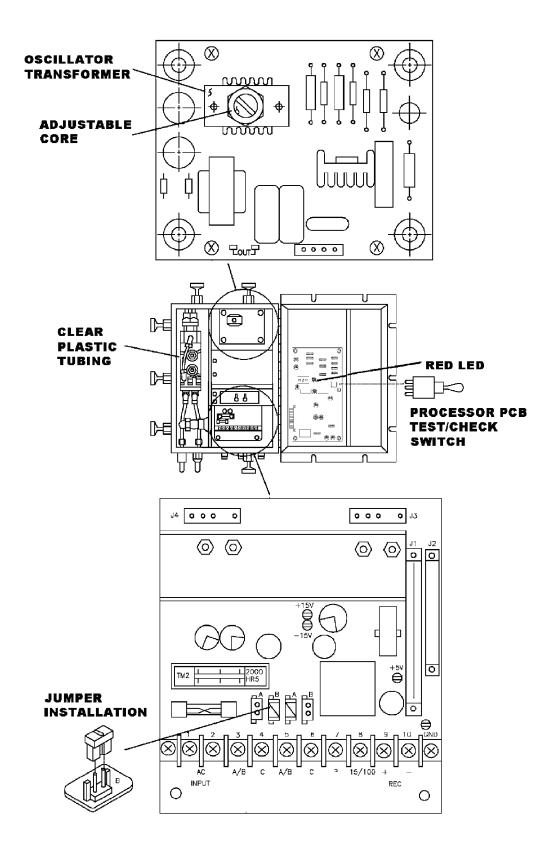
OCM Sampling/Sensor Assembly (Sheet 2 of 3).
